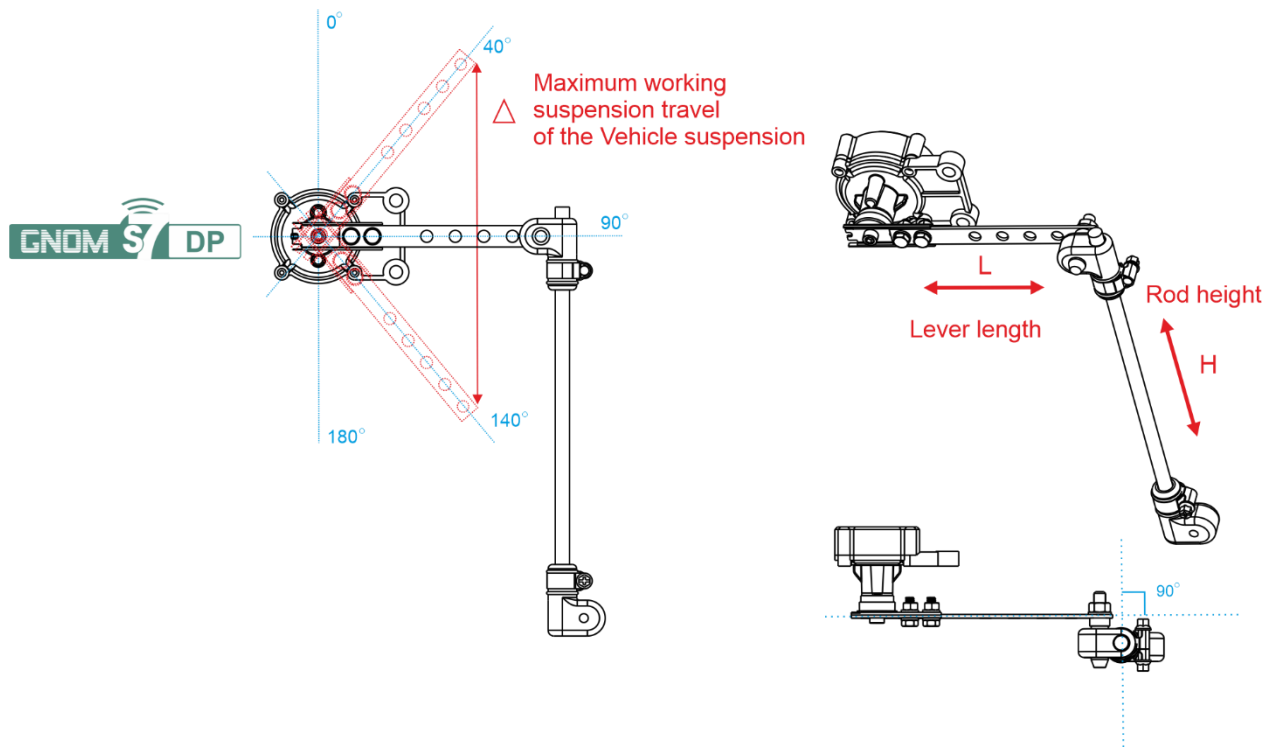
Adjusting mounting kit rod and lever for sensor mounting
